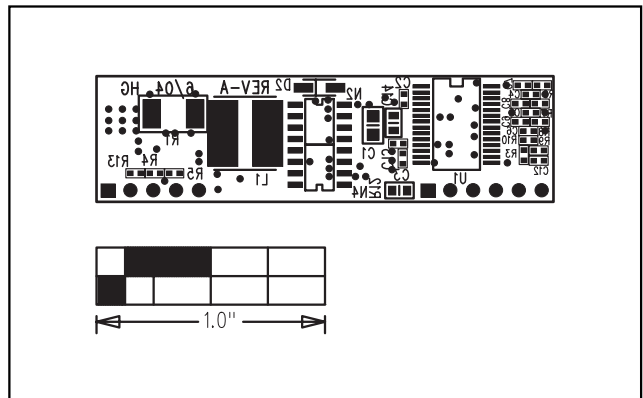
MAX5065 EV Kit Component Placement Guide—Bottom Layer
